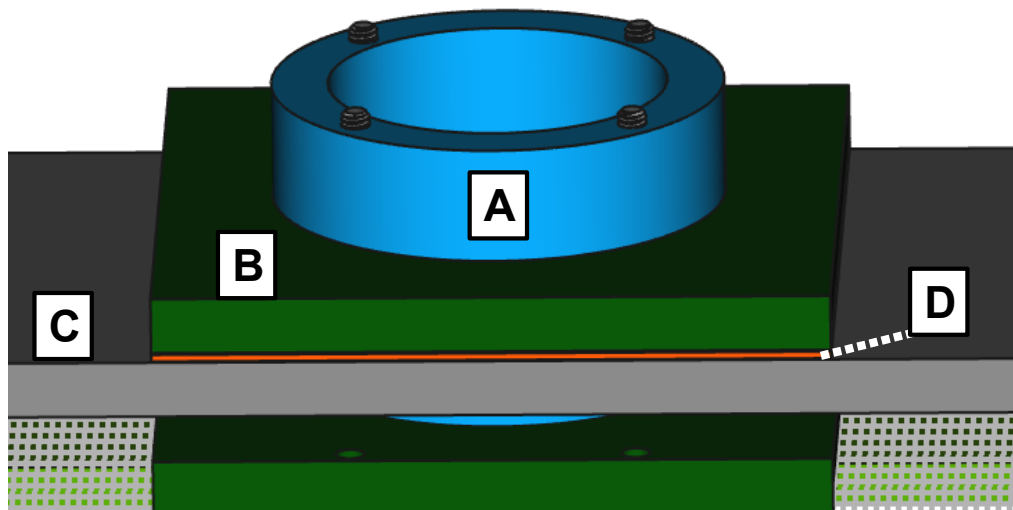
Rotating assembly: A) Hollow UHMW shaft; B) Acrylic top / bottom plates; C) Aluminum base; D) Teflon thrust bearing.
